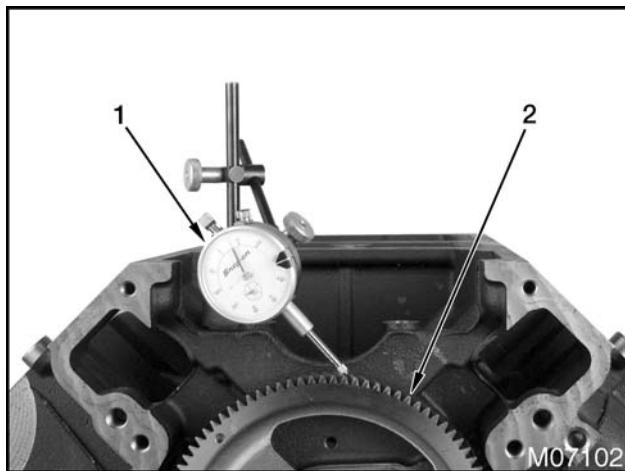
Camshaft assembly gear backlash check (camshaft gear to crankshaft gear)
